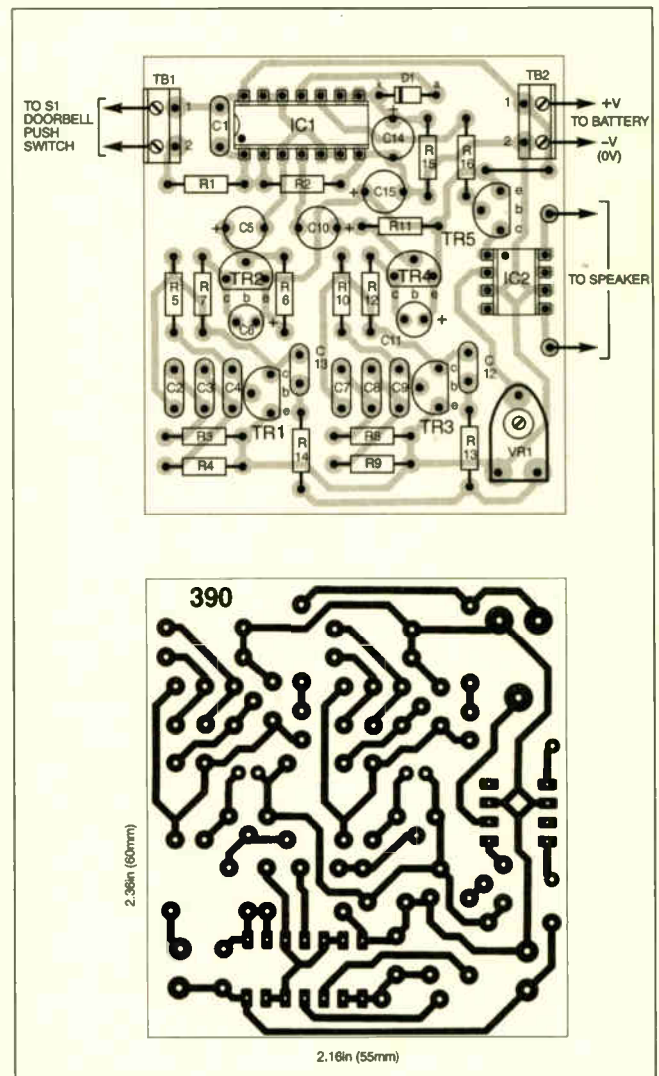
Printed circuit board component layout, wiring details and full-size copper foil master for the Door Chime.
